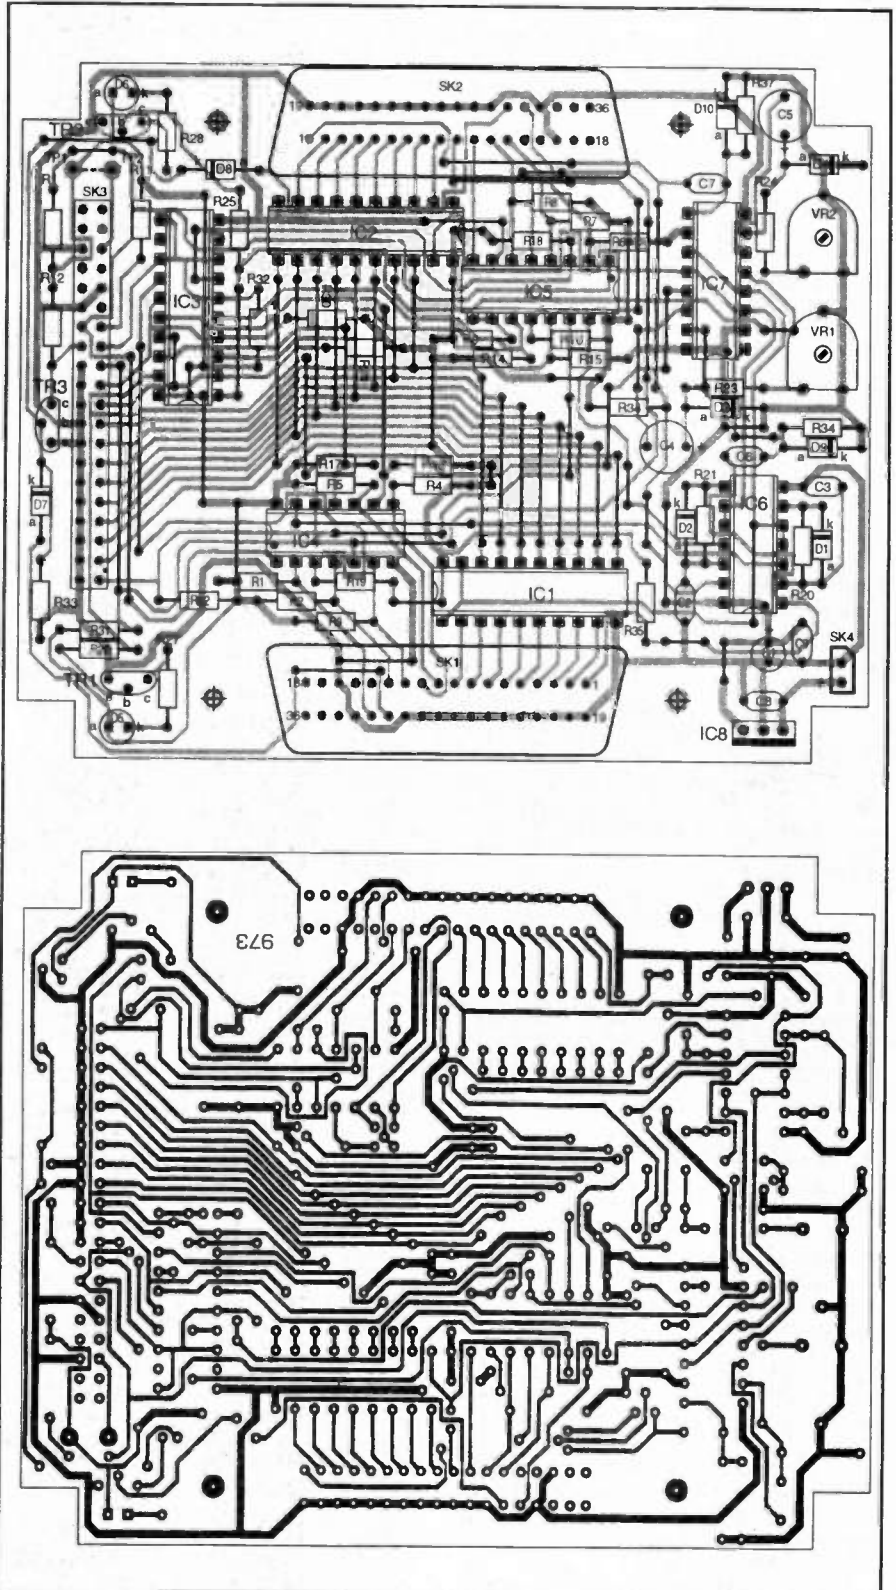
P.C.B. layout and full size track master for the Printer Sharer.
